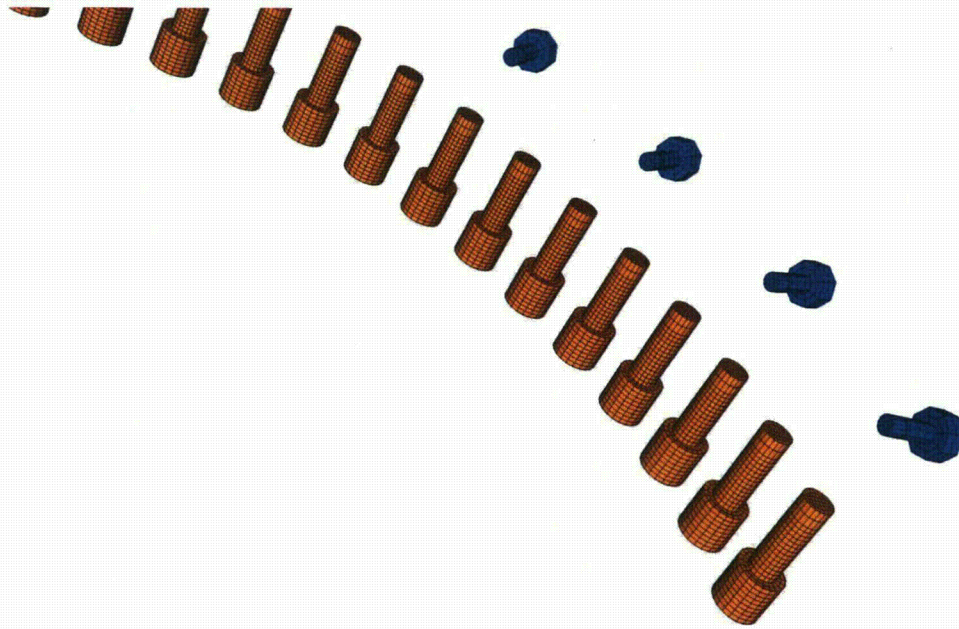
Mesh of lid closure bolts and impact limiter attachment bolts
